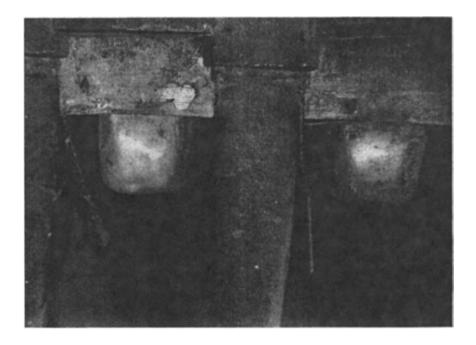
[S35] Side-coil fillers belonging to a salient-pole synchronous machine, slipping out of the end of the core approximately one inch.
